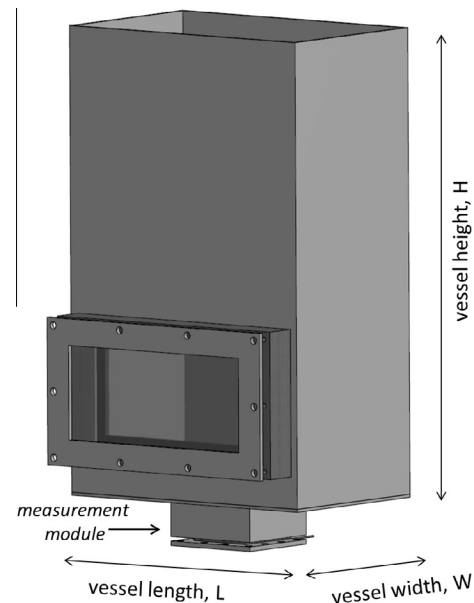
Drawing of the vessel used for the experiments with the measurement module at its bottom.
